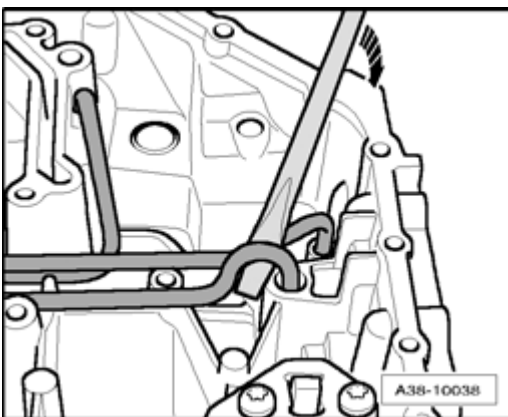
Pressing Off ATF Oil Tubes Evenly From Transmission Housing Using Screwdriver
